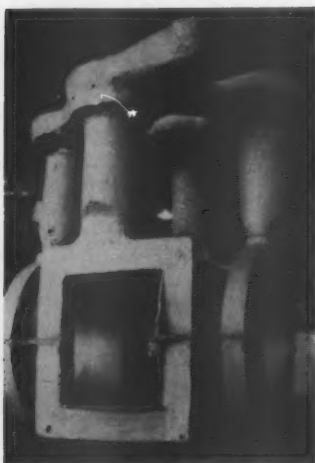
NICKEL-CHROMIUM CAST IRON VALVE SECTION.
